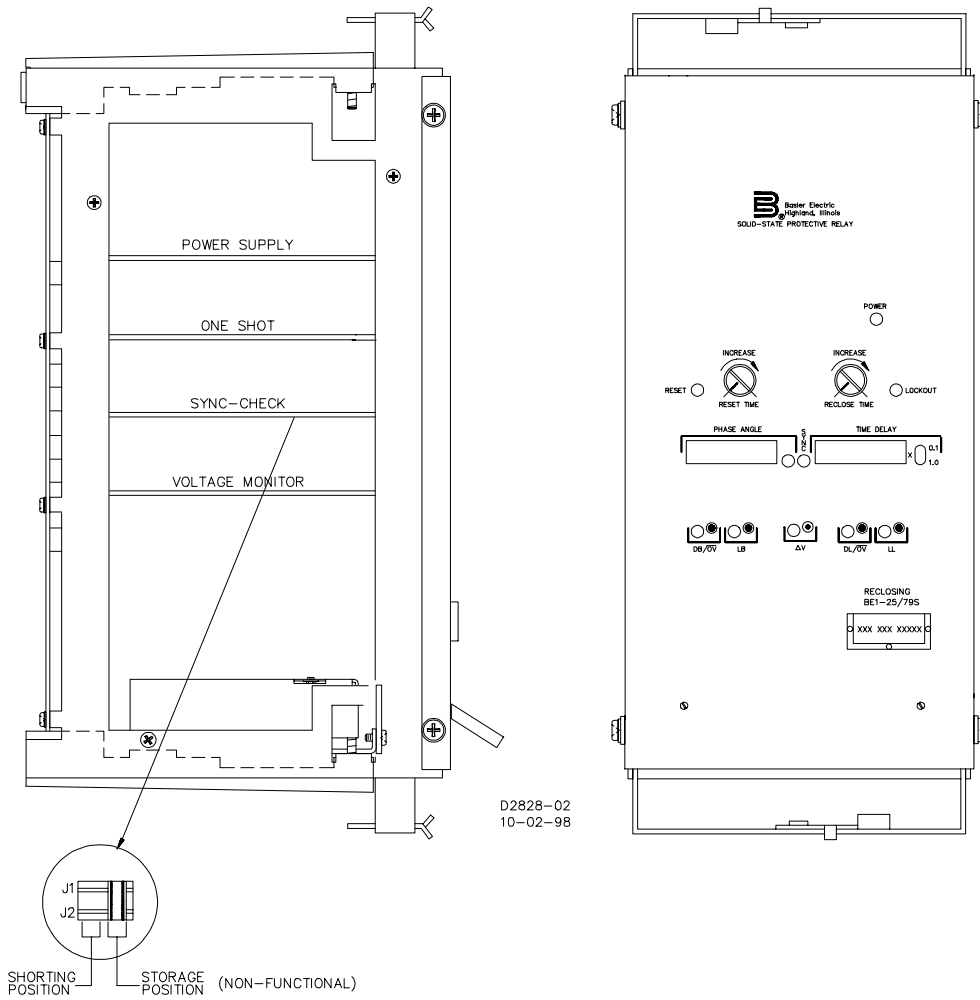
Sync-Check Board Shorting Plug Location, M1 Case
